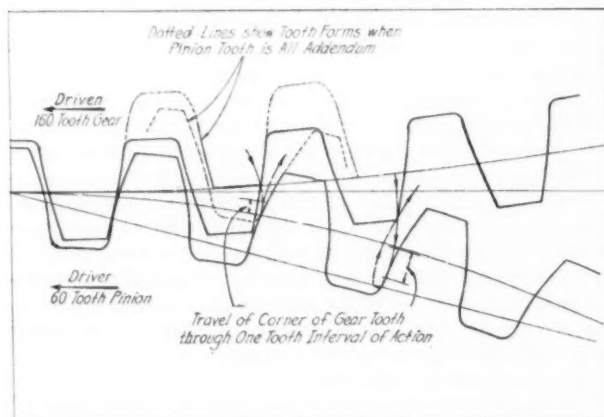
DRAWING SHOWING APPROACH ACTION OF GEARS TESTED
